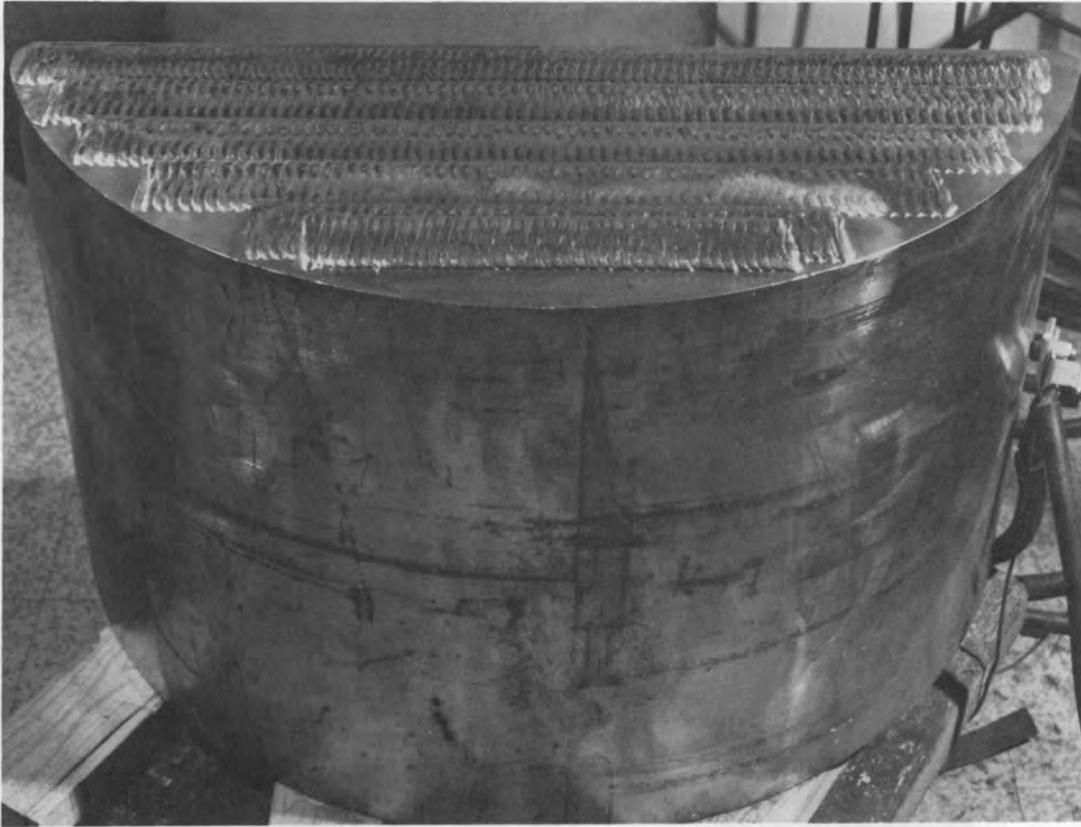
Surface view of the first layer of weld clad on alloy 800H forging. Seven layers were required to complete the cladding.
